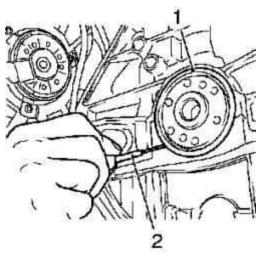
Removing the plastic ring: 1 - plastic ring, 2 - Screwdriver
